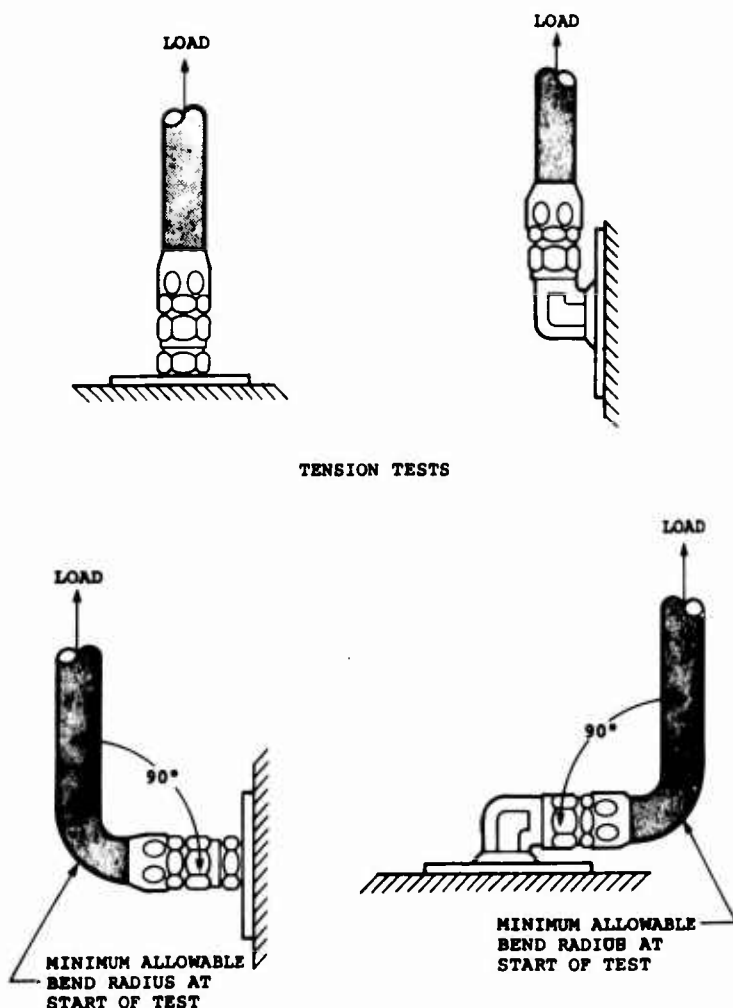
Hose Assembly Tests. (Figure 2 of the draft fuel system specification)
